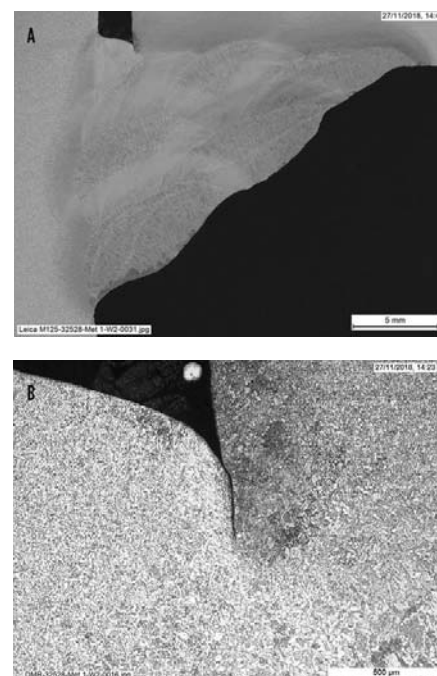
(A) Overview of Weld 2, which was located between the nozzle and the reinforcement pad; and (B) detail of the lack of fusion at the reinforcement pad side of the weld.
